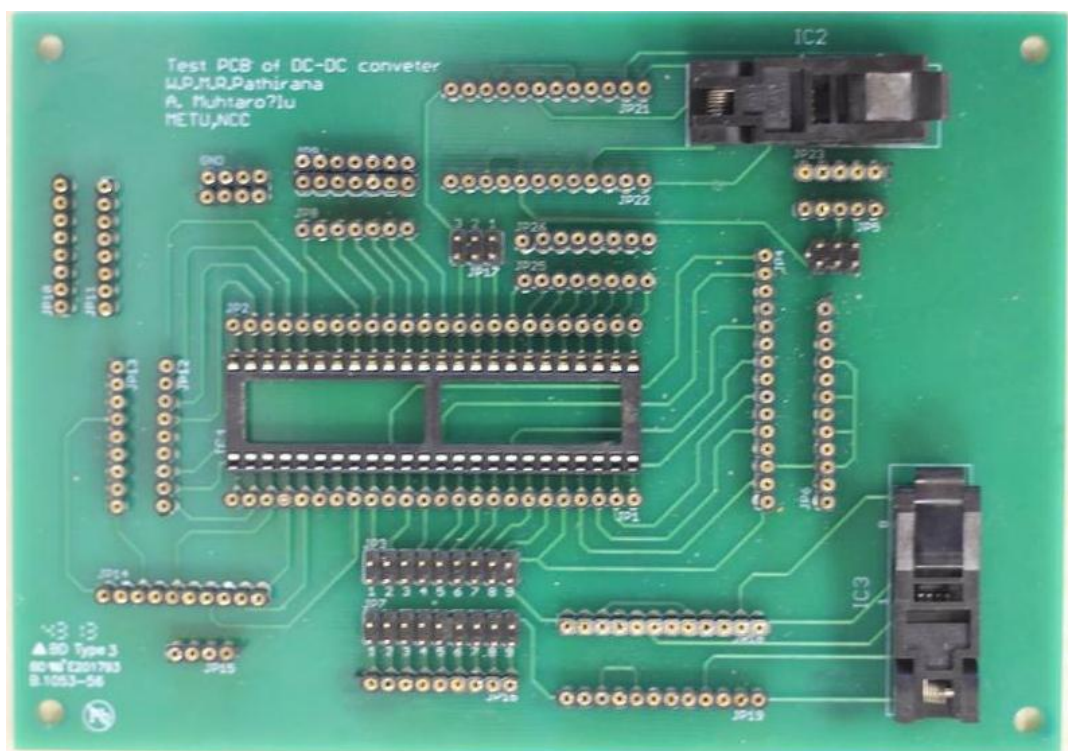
Designed test PCB for the UMC 0.18  $\mu\text{m}$  chip
